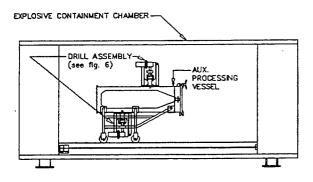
MMD-2 DRILL & EXTRACTION ASSEMBLY ATTACHED TO APV WITHIN EXPLOSIVE CONTAINMENT CHAMBER
